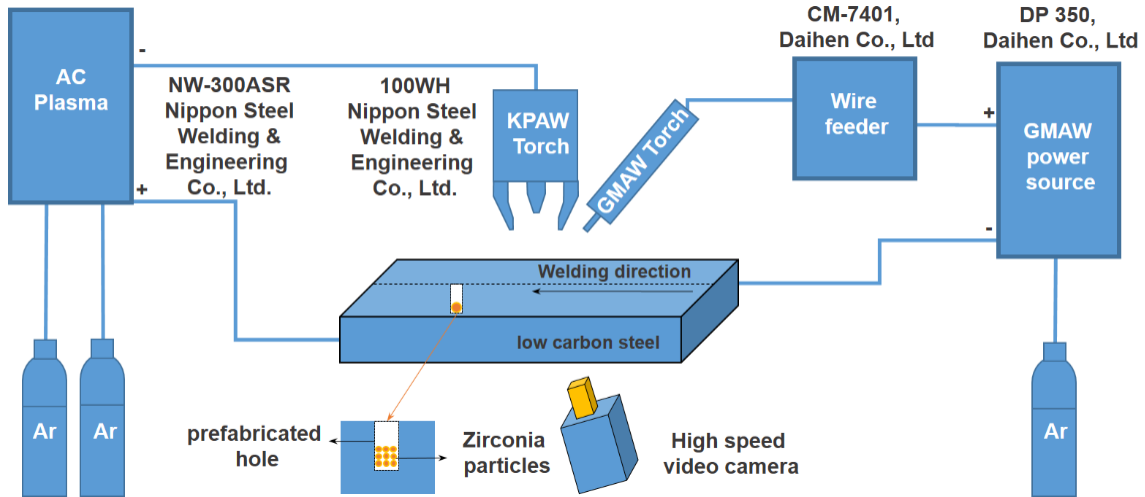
The welding experiment setup of the hybrid KPAW-P-GMAW
